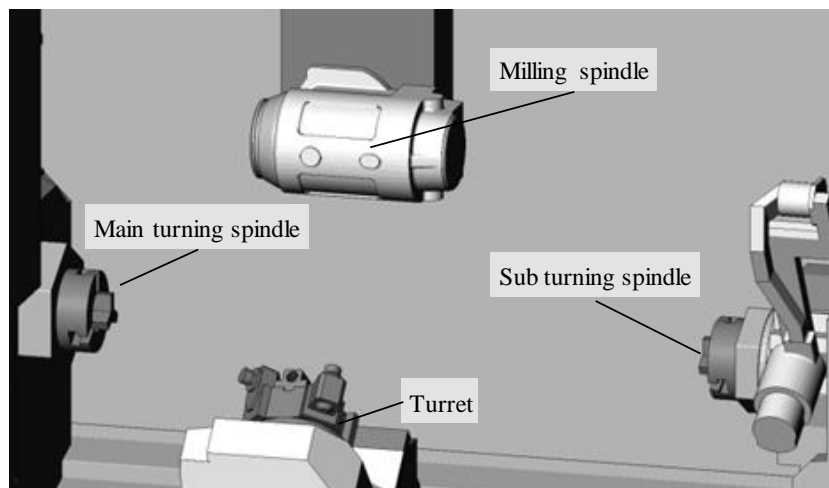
Construction of multi-tasking machine tool having sub turning spindle and a turret
